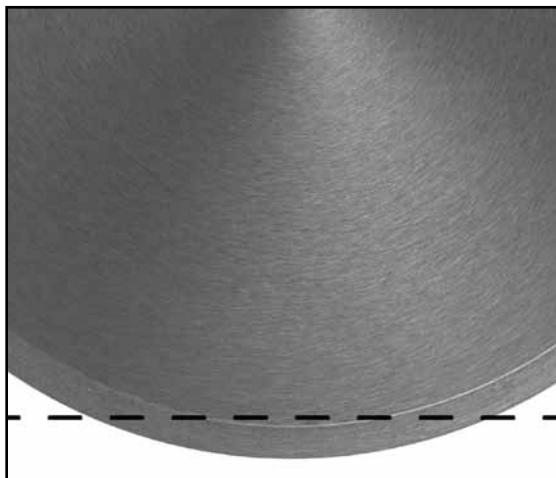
Coolant level should cover the bottom 1/4" of the blade
